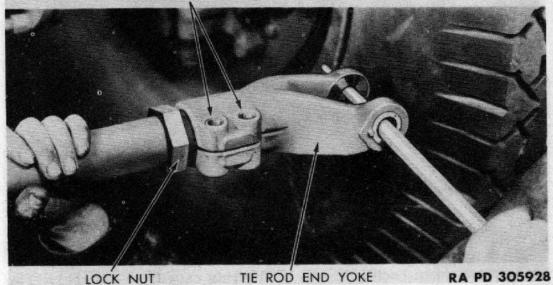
Turning Tie Rod End Yoke to Adjust Toe-in
